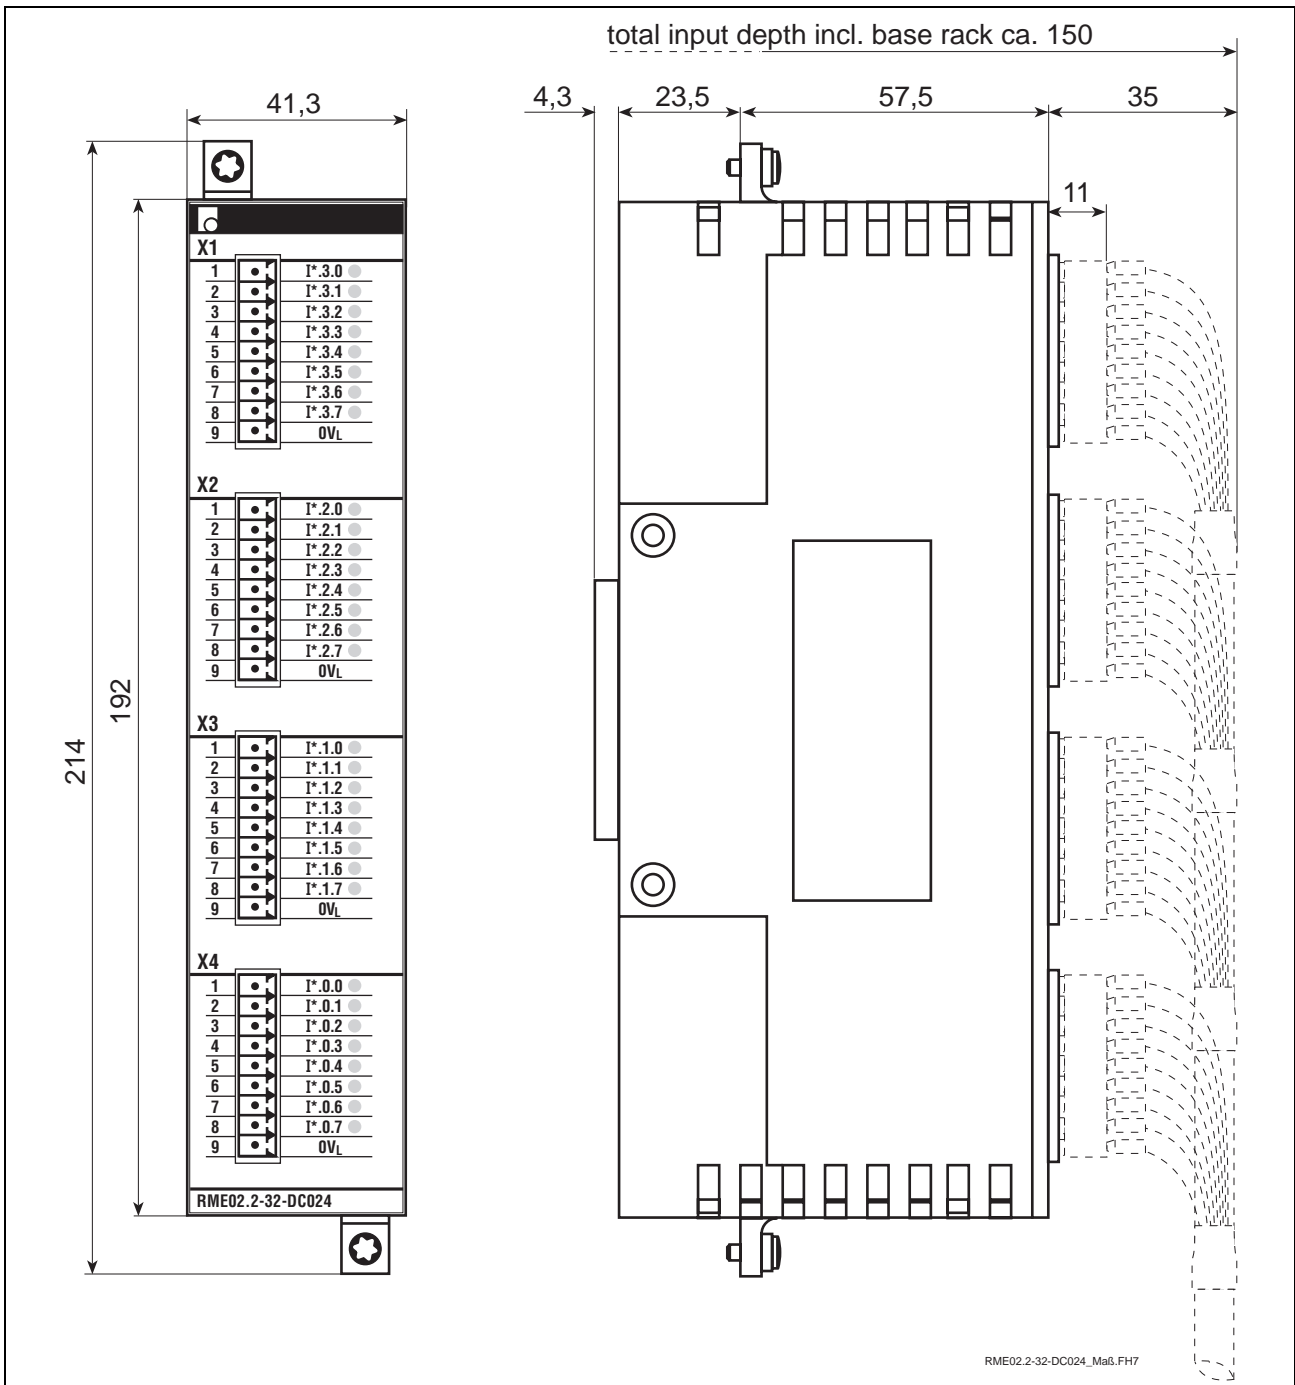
Mounting dimensions of RME02.2-32-DC024
